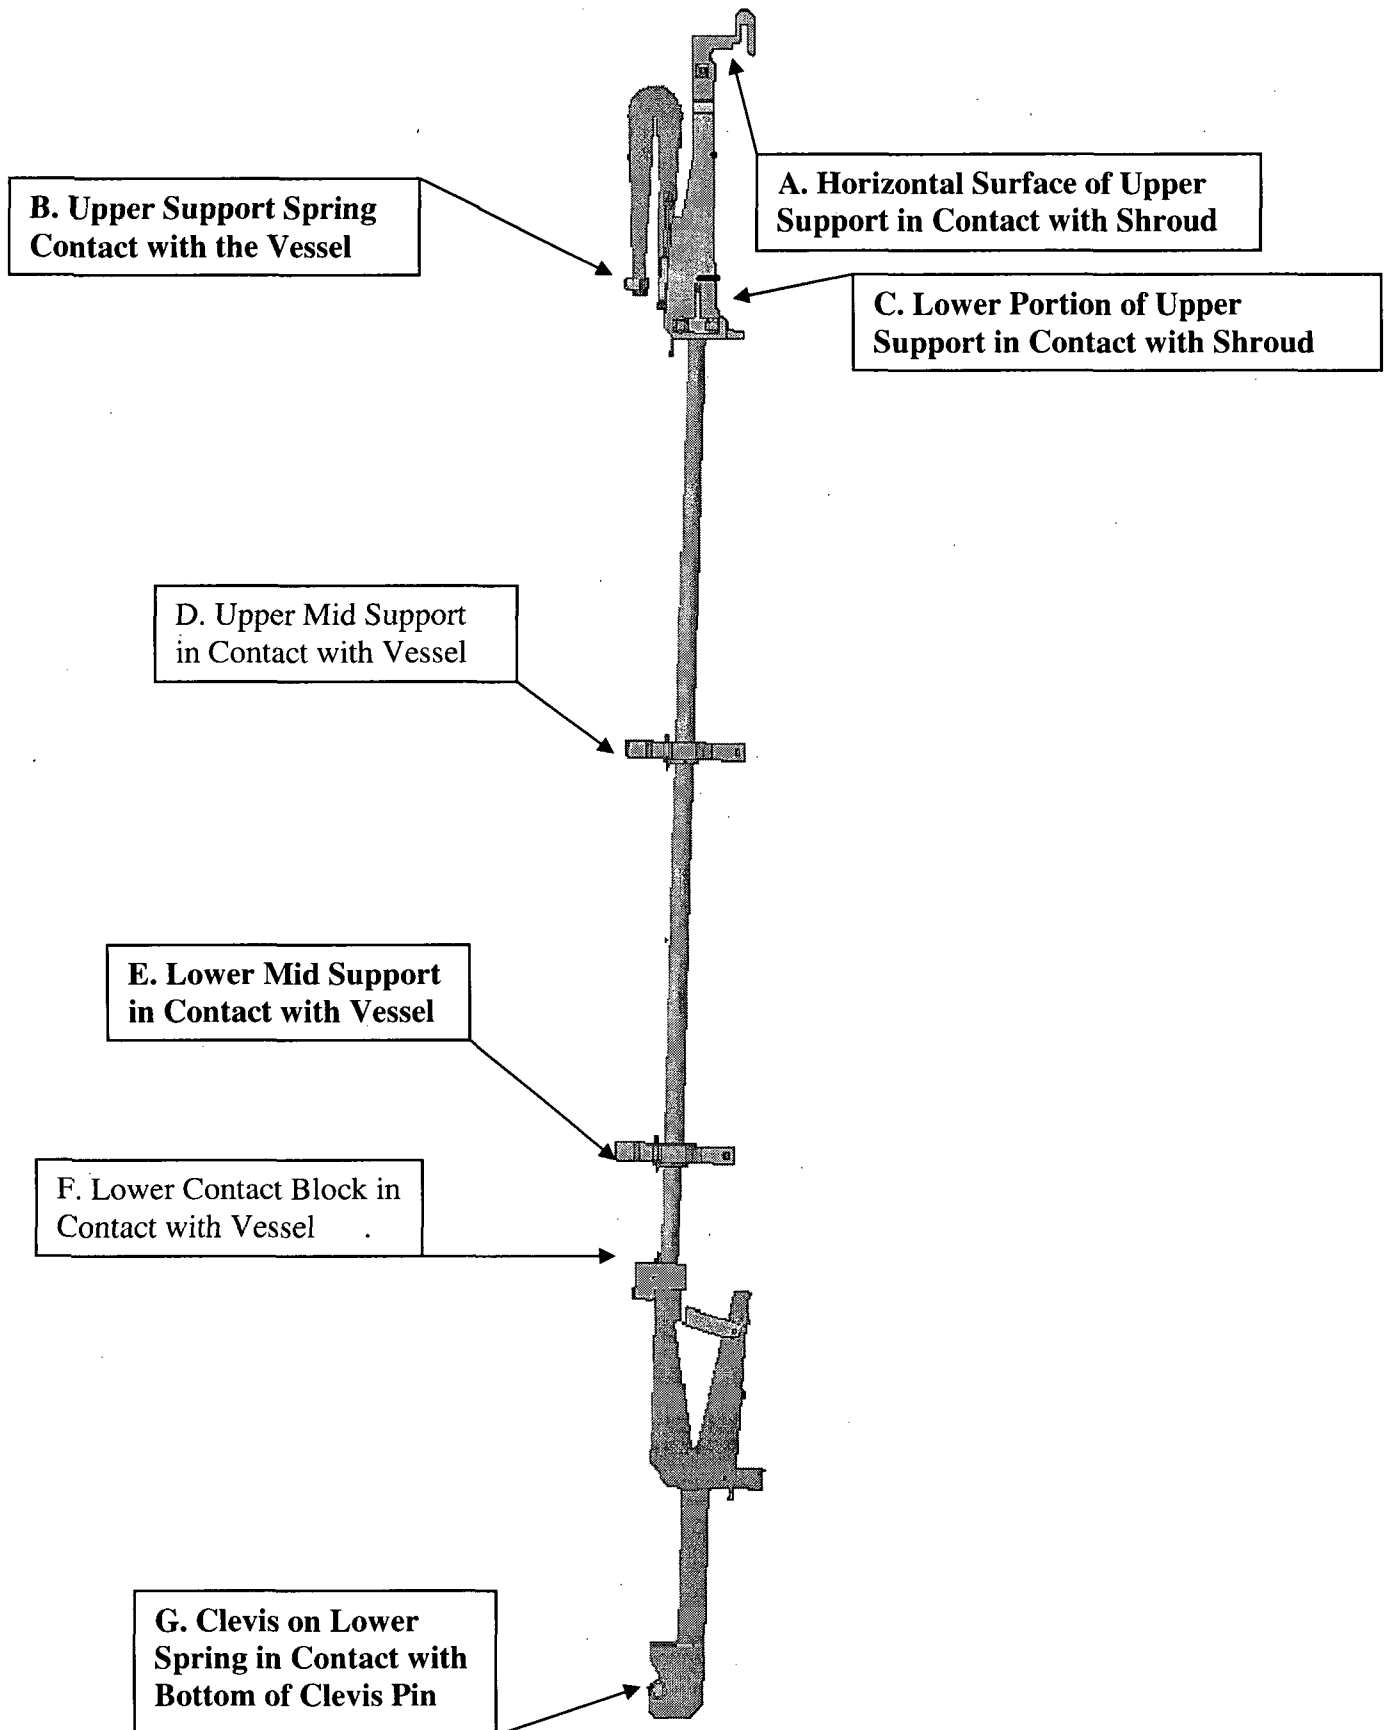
SHROUD STABILIZER AND TIE ROD ASSEMBLY
